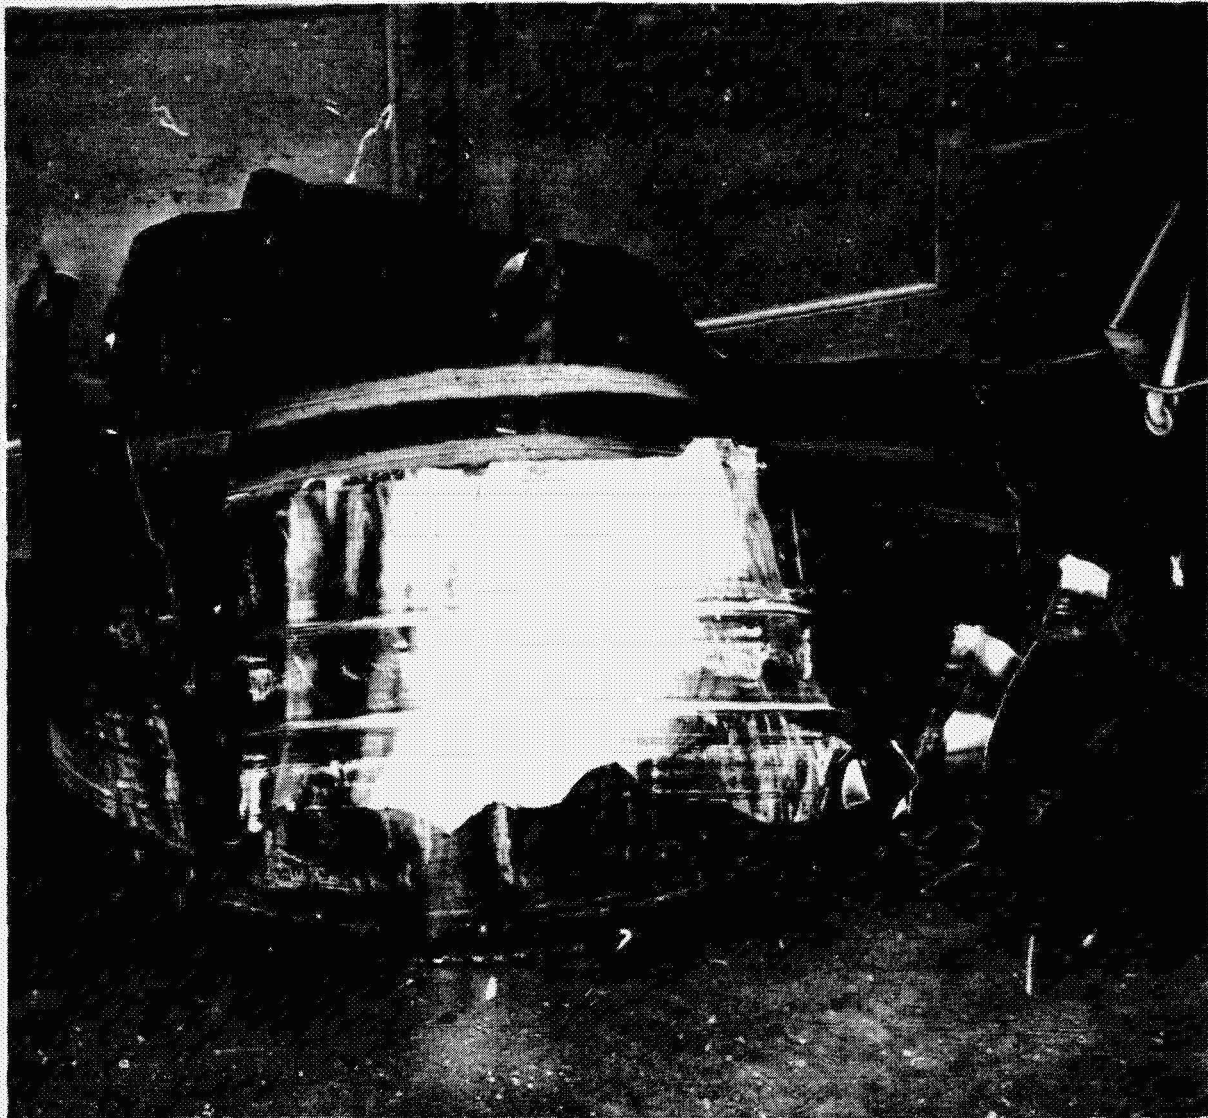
DPS Propellant Tank Failed Cylindrical Section
